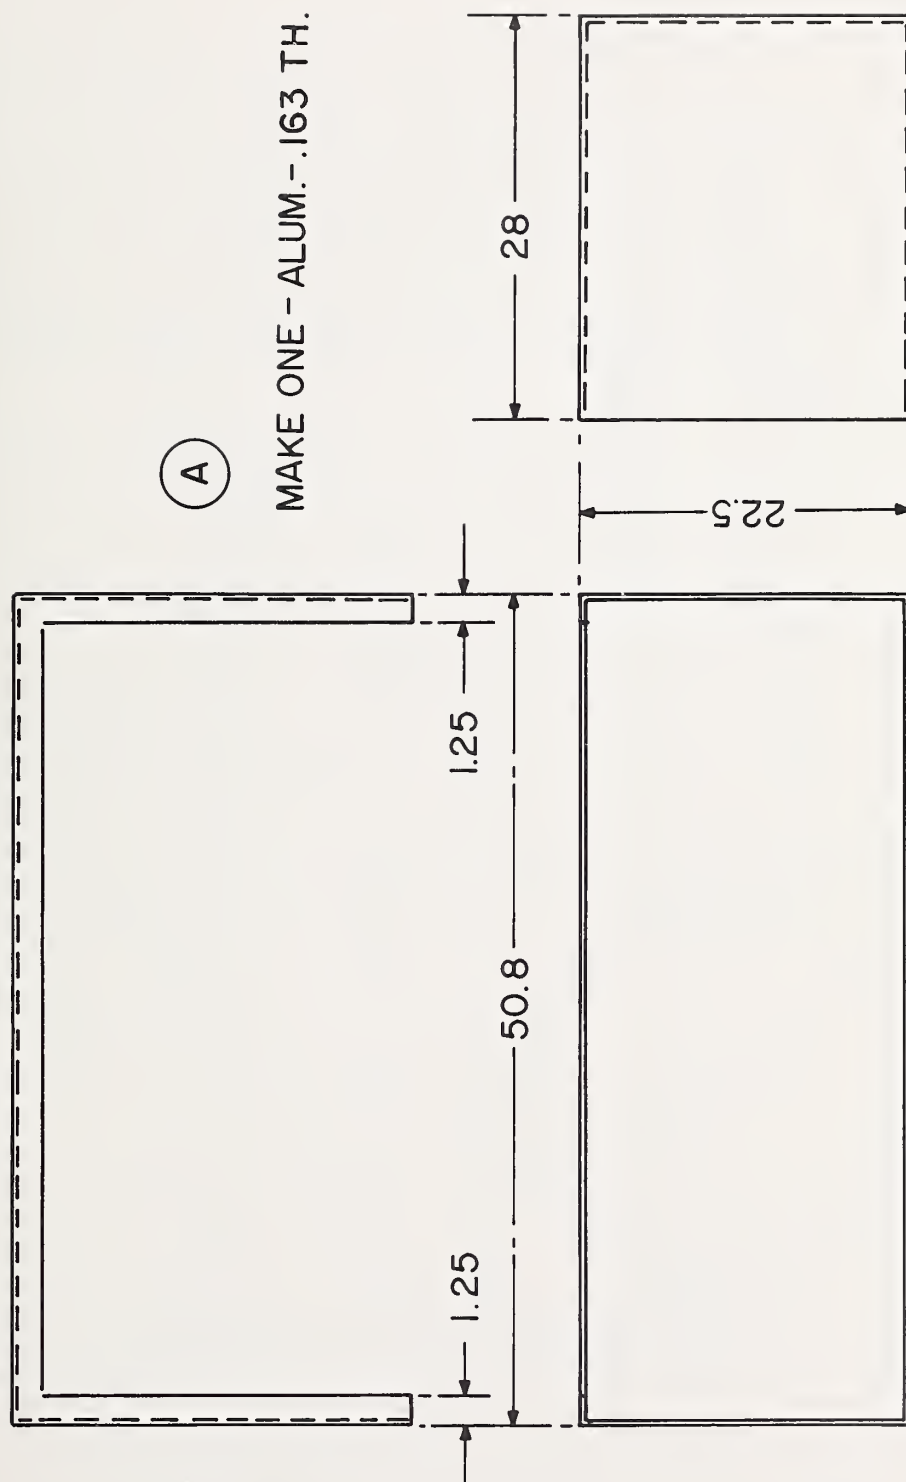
Drawing detail of the portion of the housing that contains the base drive and control chassis. Dimensions are given in centimeters.
